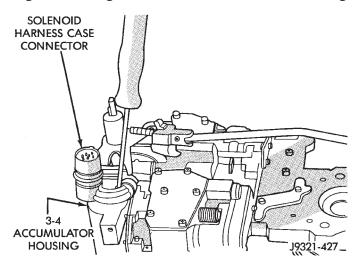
Solenoid Harness Case Connector Shoulder Bolt
